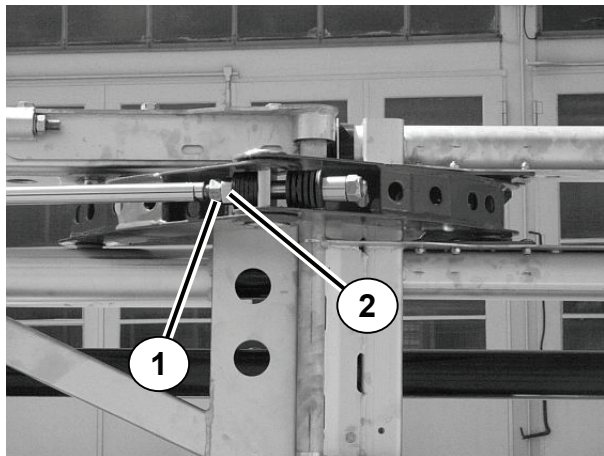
Change the holding tension on the 3rd hydraulic cylinder (whilst unfolded)
